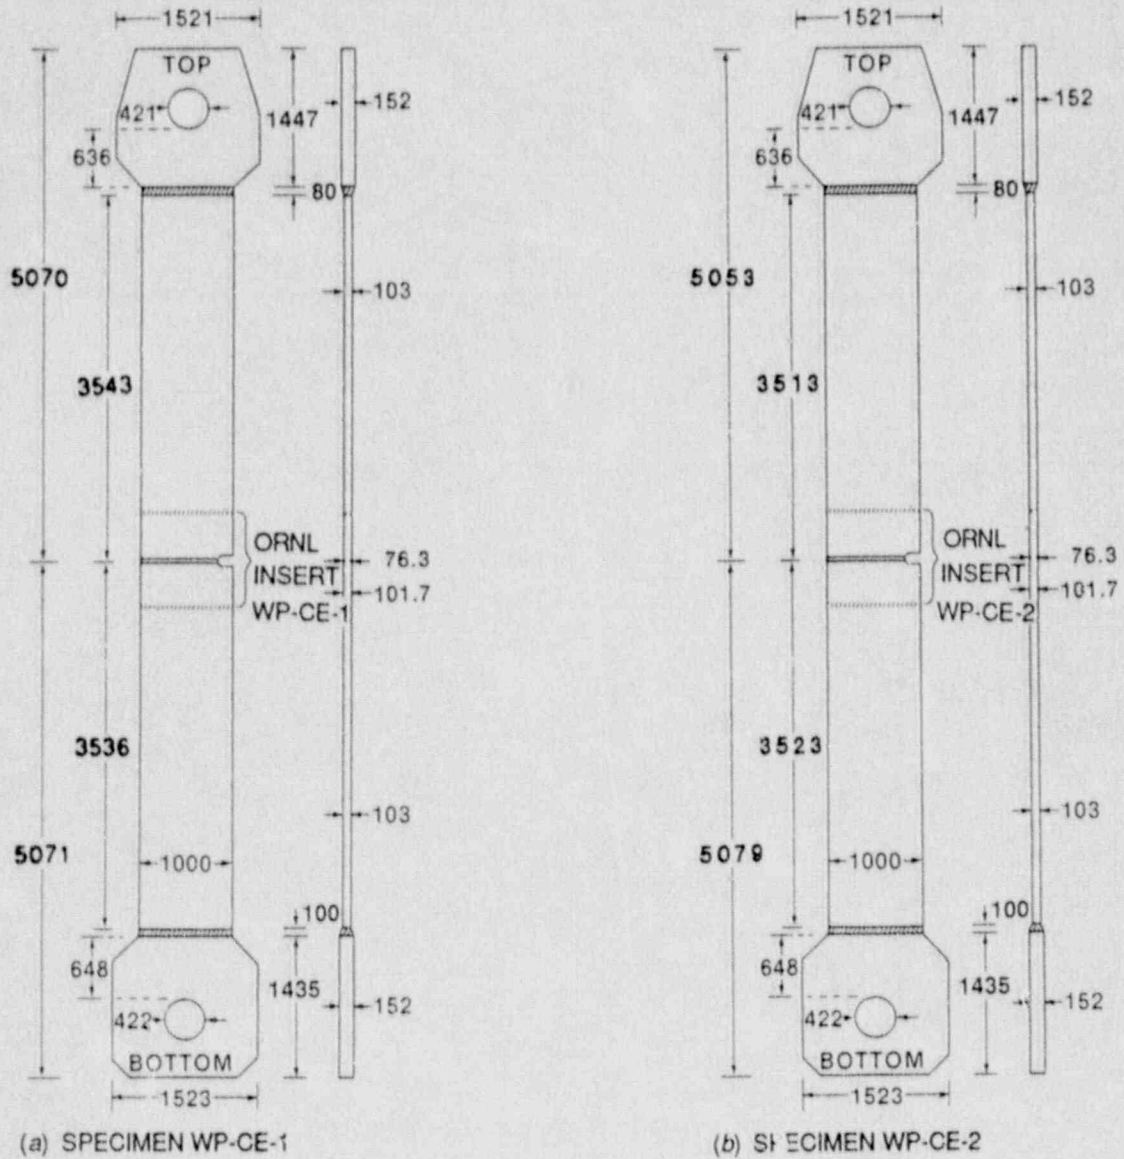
Overall dimensions of HSST wide-plate crack-arrest specimens and pull plates for (a) specimen WP-CE-1 and (b) specimen WP-CE-2.
